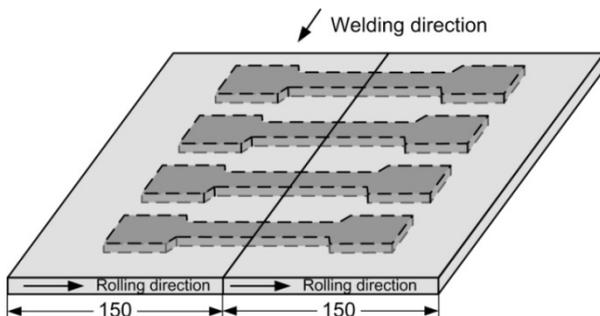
Scheme of welding with respect to rolling direction and extraction of tensile.
